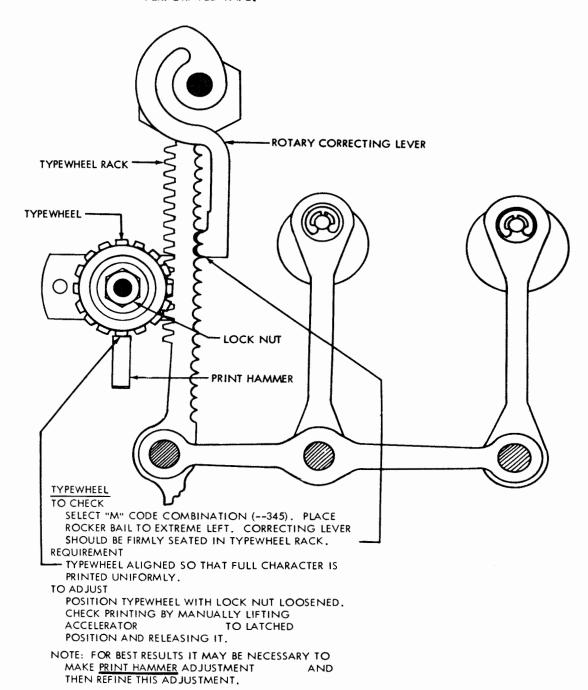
D. TYPING REPERFORATOR TT-373/UG, TT-375/UG, PRINTING MECHANISM FOR FULLY PERFORATED TAPE
